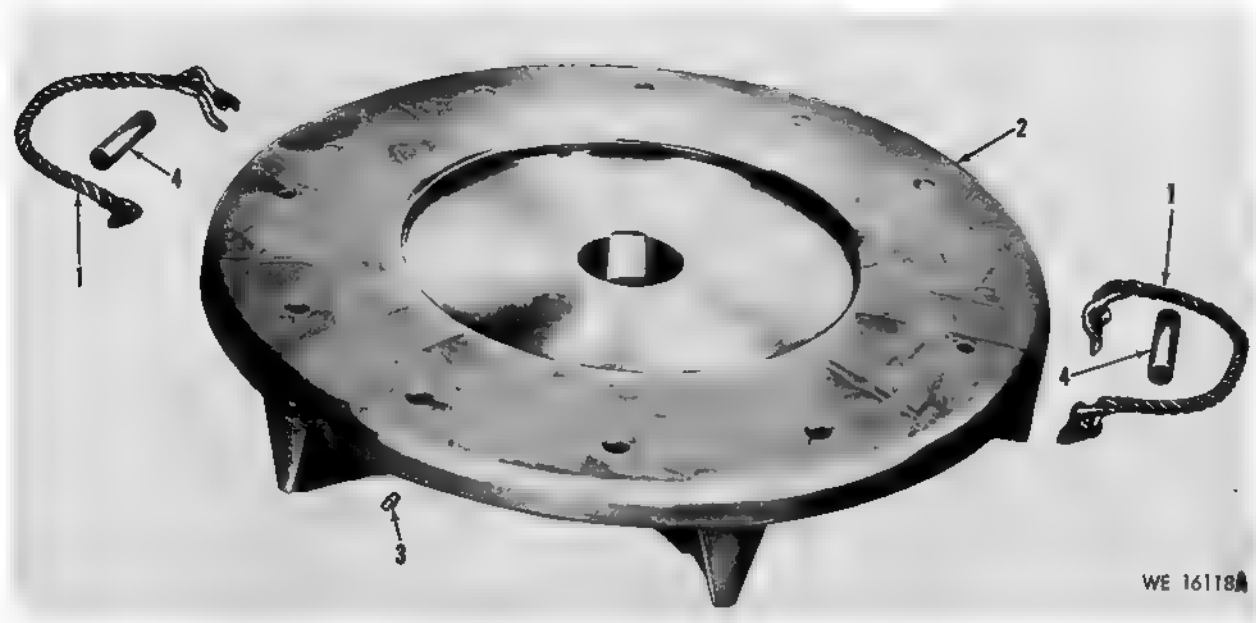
Baseplate assembly (M24A1 only)—partially exploded view.
